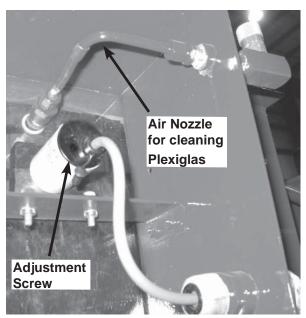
Level Detector (PROX 1) / Air Nozzle
